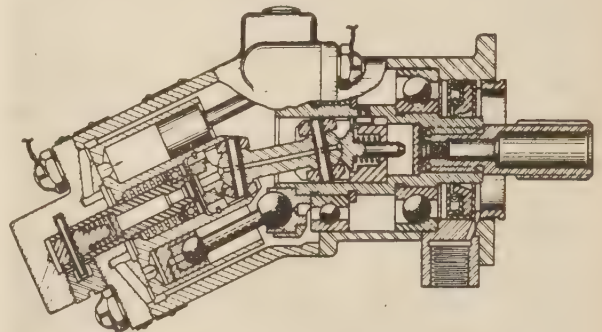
CONSTANT-DELIVERY TYPE OF AXIAL-PISTON PUMP
